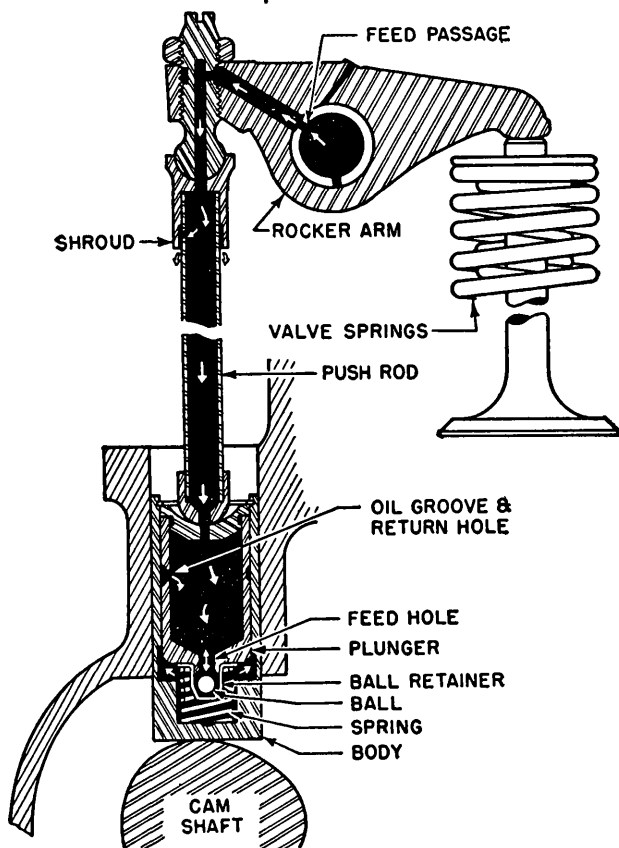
Hydraulic operation of General Motors type valve lifter as applied to Buick. In Cadillac, Chevrolet and Oldsmobile engines, it is supplied through a line located in the engine block
